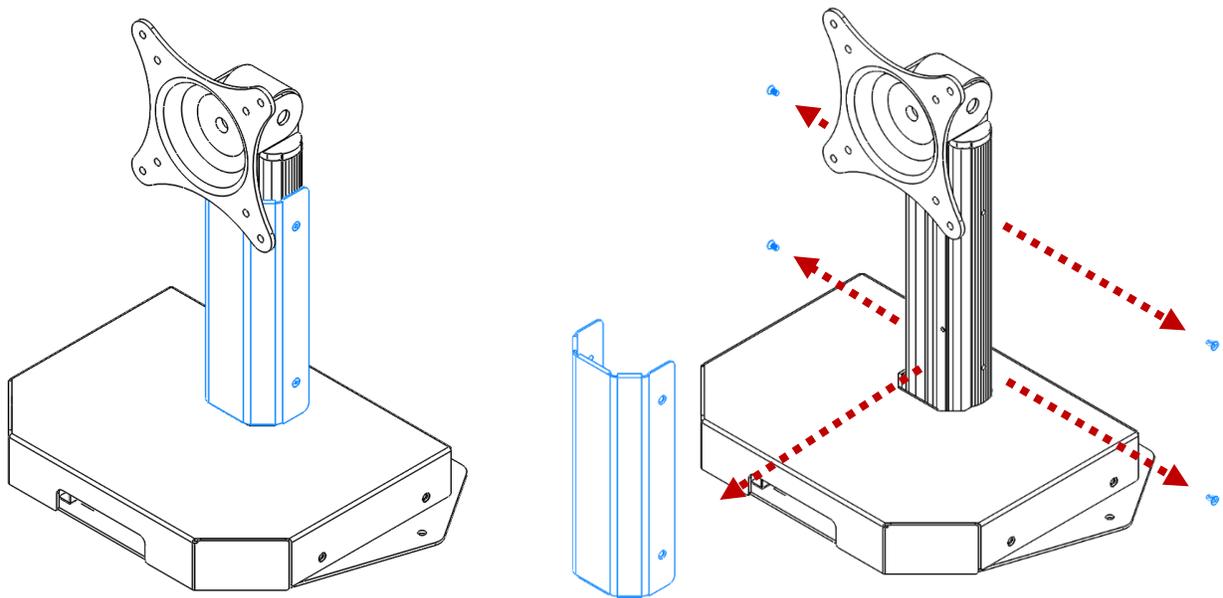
A: STAND ISOMETRIC FRONT VIEW, REMOVING CABLE COVER
